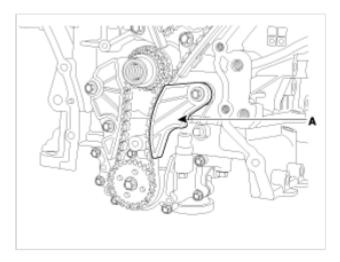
Identifying Oil Pump Chain Tensioner Assembly
